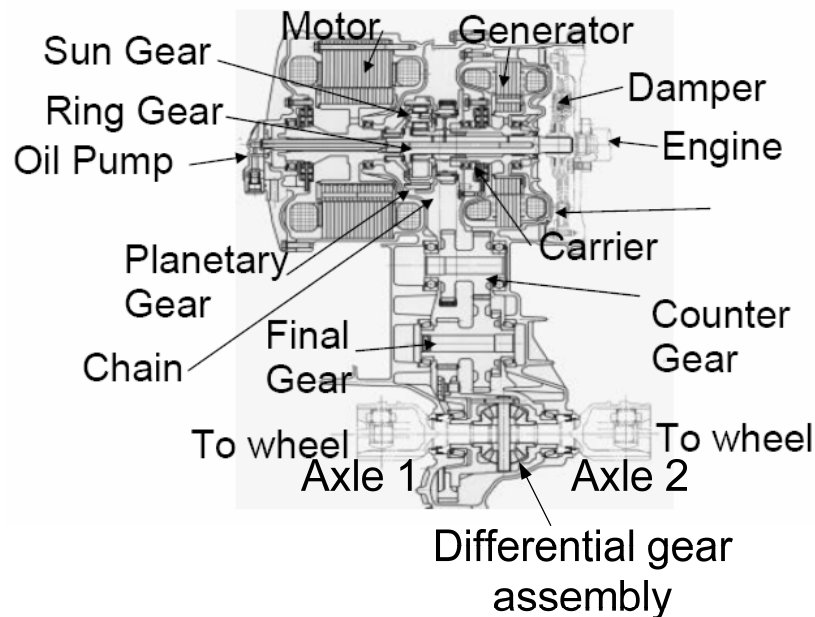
Motor, generator, engine, differential gear assembly, and axles of the Toyota/Prius hybrid traction drive system.
